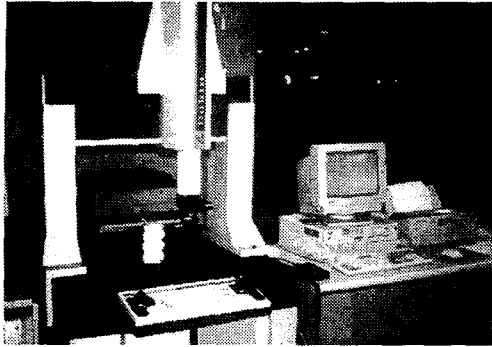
3-dimensional scanning of manufactured rotor geometry
